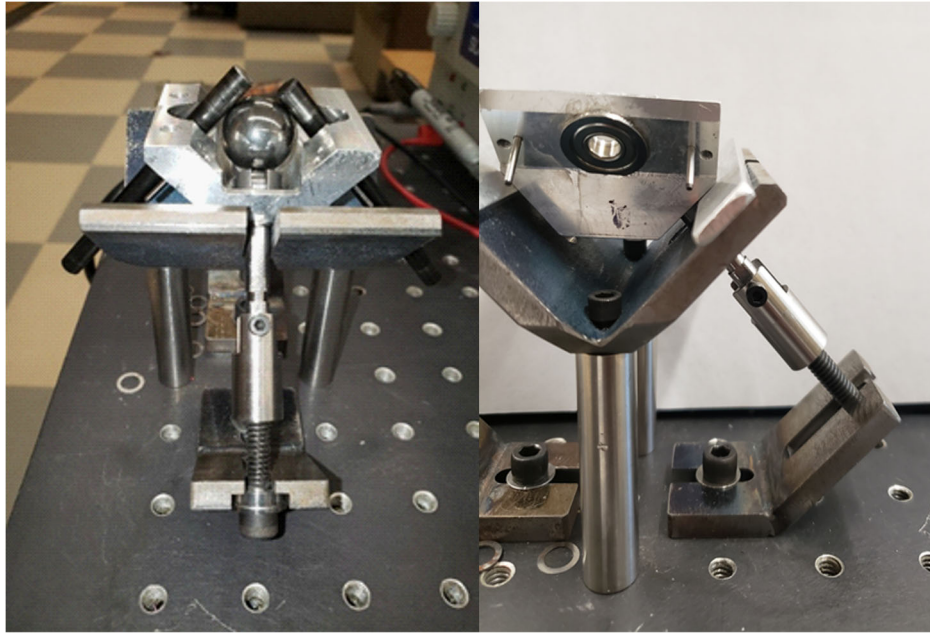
CVT preload mechanism used to assembly the CVT and apply preload
